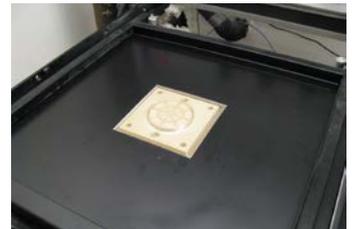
After the heated PEEK sheet becomes taut, apply the vacuum and hold until cooled.
